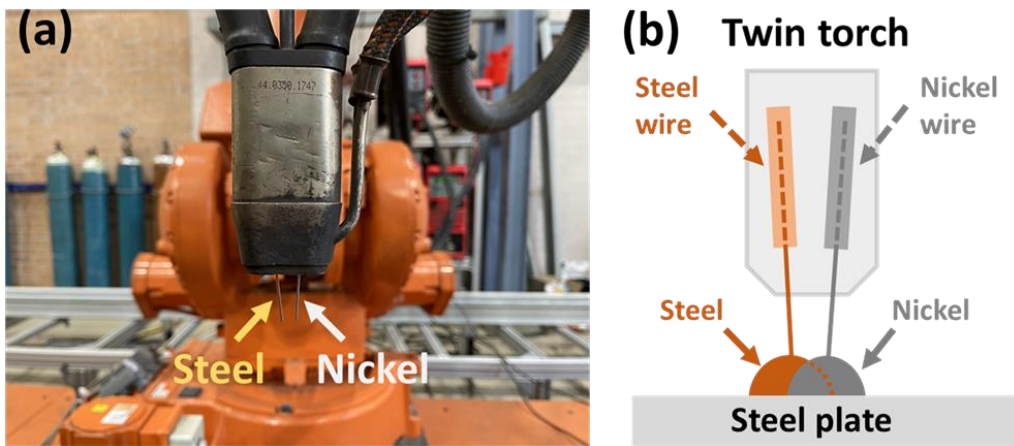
Illustration of (a) double welding torch and (b) the principle of the twin welding torch.
